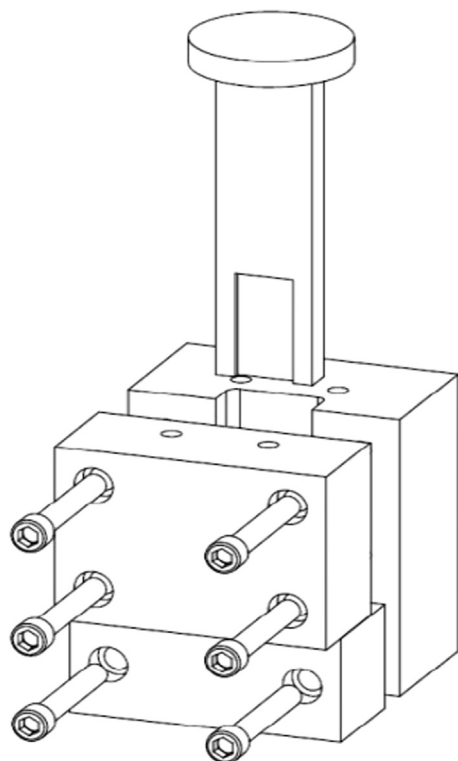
Schematic of die designed and manufactured for ECAP of strip shaped specimens.
